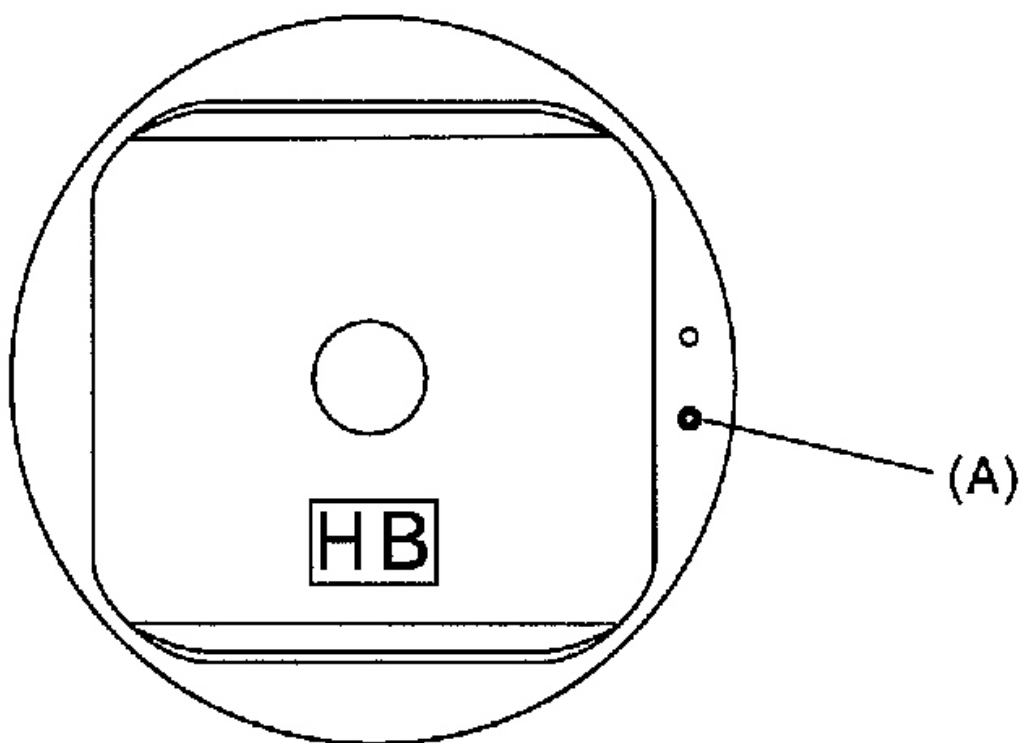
Identifying Lubricating Points Of Piston And Piston Pin
